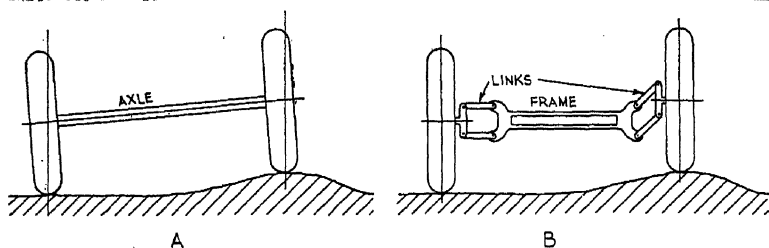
(A) Rigid Front Axle Springing. Axle Tilted when One Wheel encounters Road Bump. (B) Independent Springing. Frame remains horizontal and Wheels Vertical.
